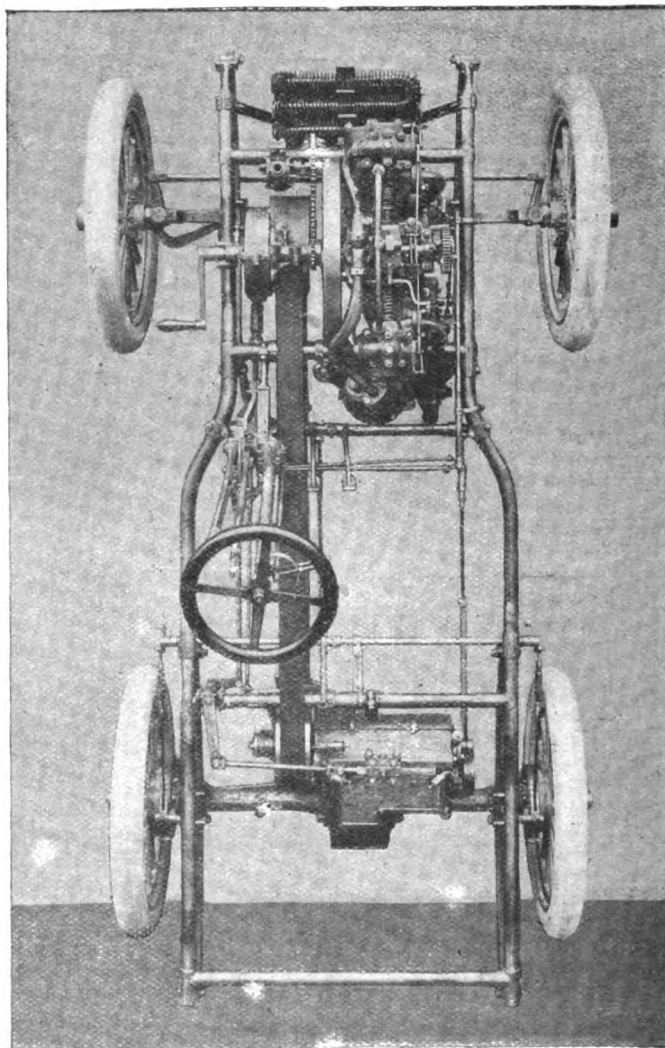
PLAN OF LUX 6-H.P. BELT AND GEAR-DRIVEN CAR.
